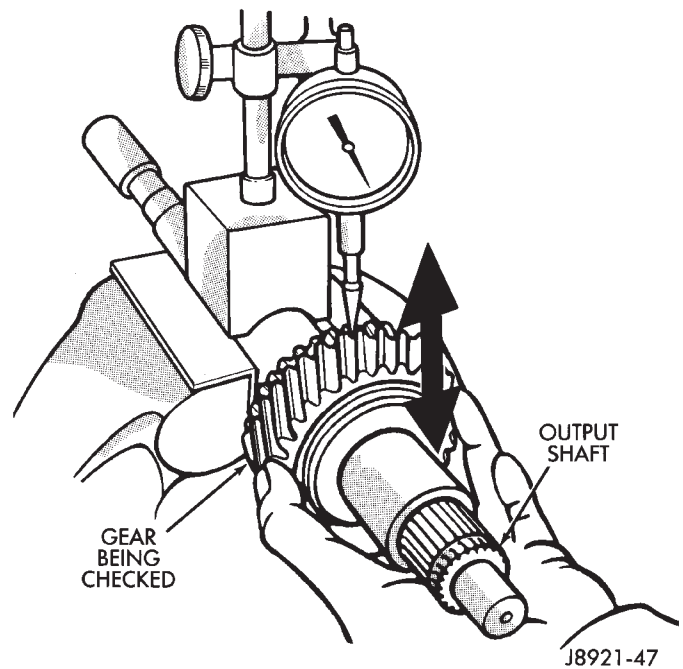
Checking Output Shaft Tolerances
